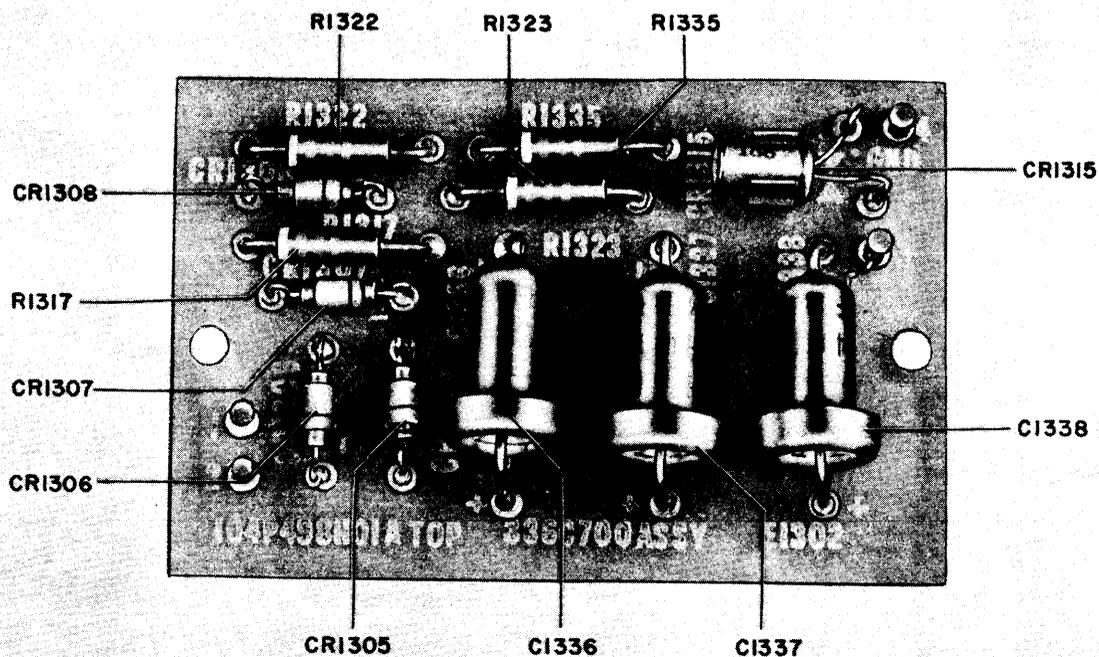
Electrical Frequency Control C-2764/WRT-2, E1302, -6 VDC Regulator, Location of Parts
